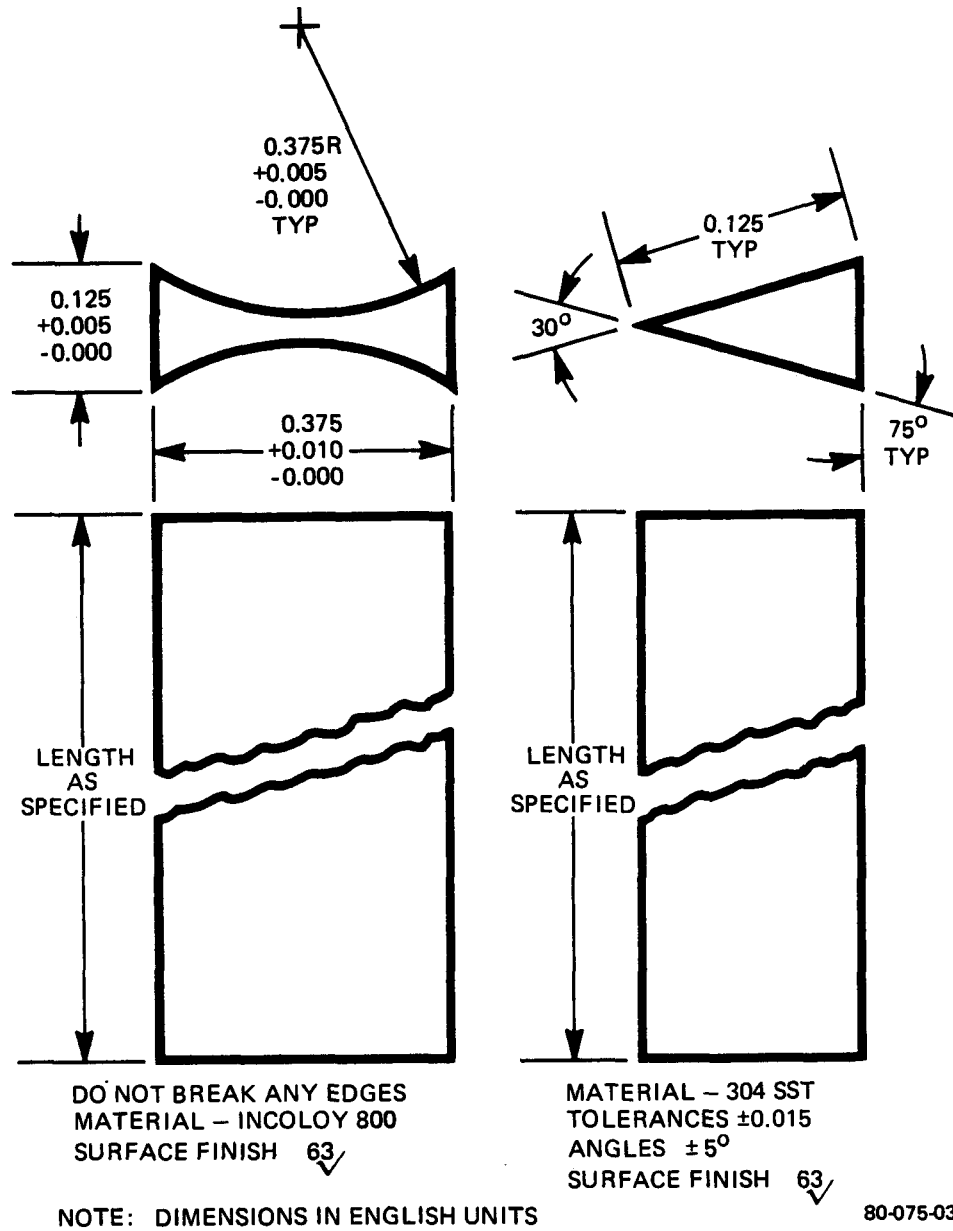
Details of the Hourglass and Triangular Shaped Filler Strips Used Between Adjacent Tubes
